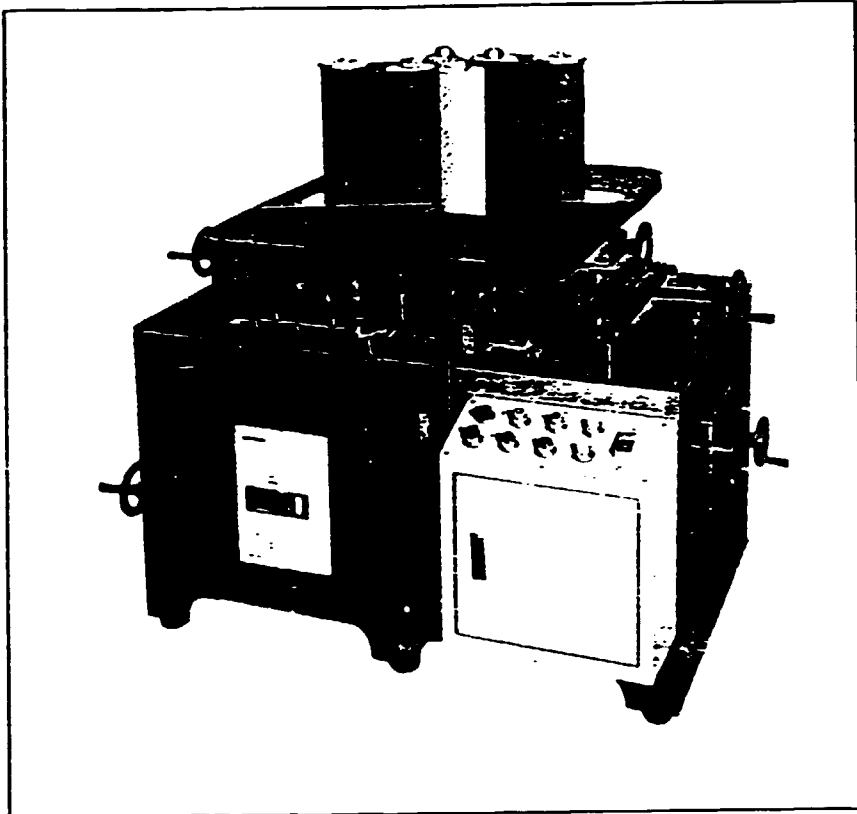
Sanding machine designed specially for thin sides of workpieces and lacquer sanding.
